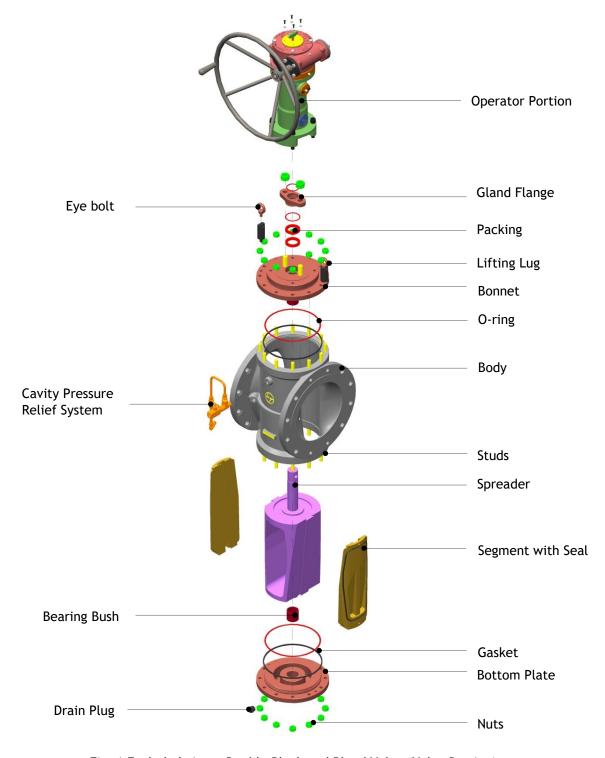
Exploded view - Double Block and Bleed Valve (Valve Portion)
